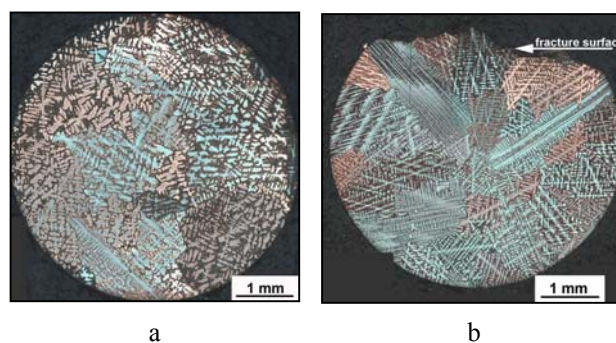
Dendritic structure. Transversal sections of the gauge length of specimens. a – batch 1, b – batch 2. Fracture profile created by intersection of the plane of the metallographic section by fracture surface can be seen
